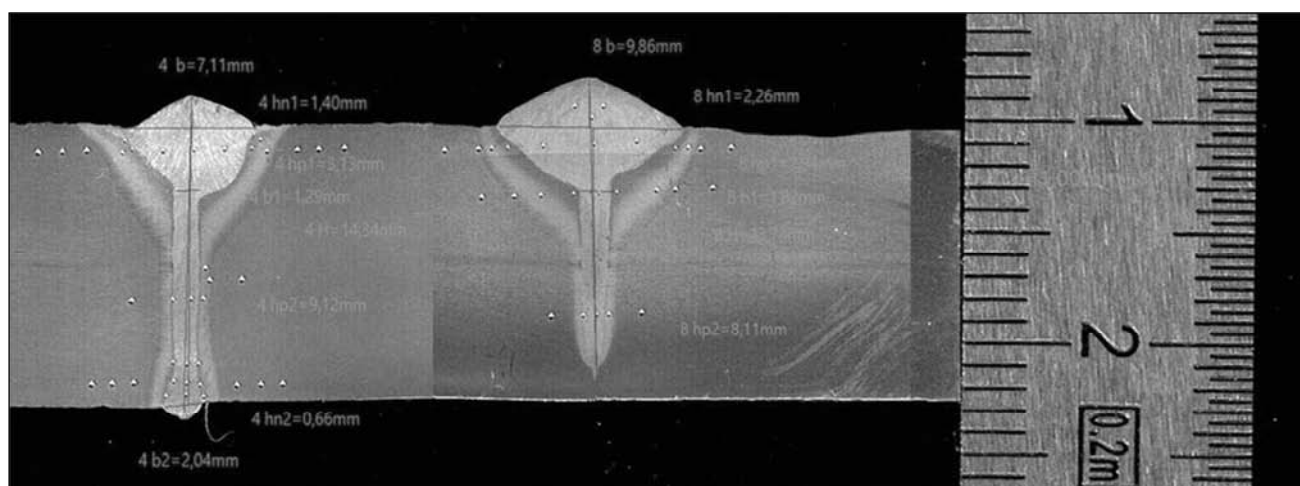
Cross-sections of HLAW: a) Weld no. 4; b) Weld no.8
